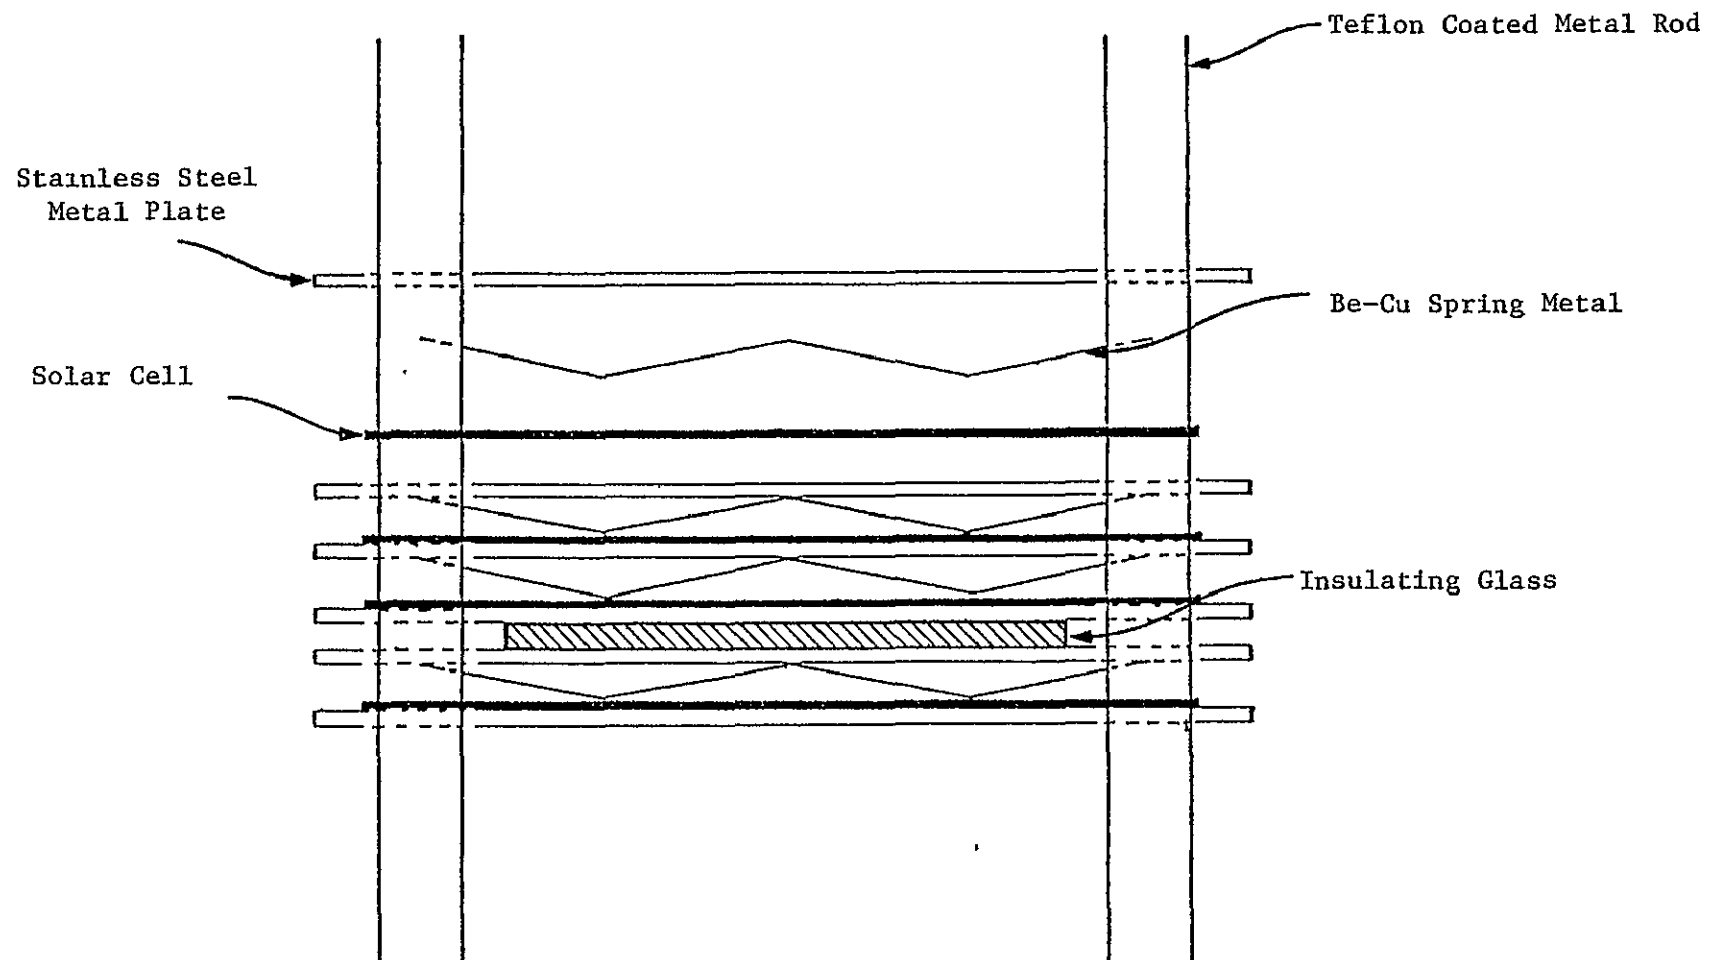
Schematic Exploded View of New-Design Stress Testing Jig.
